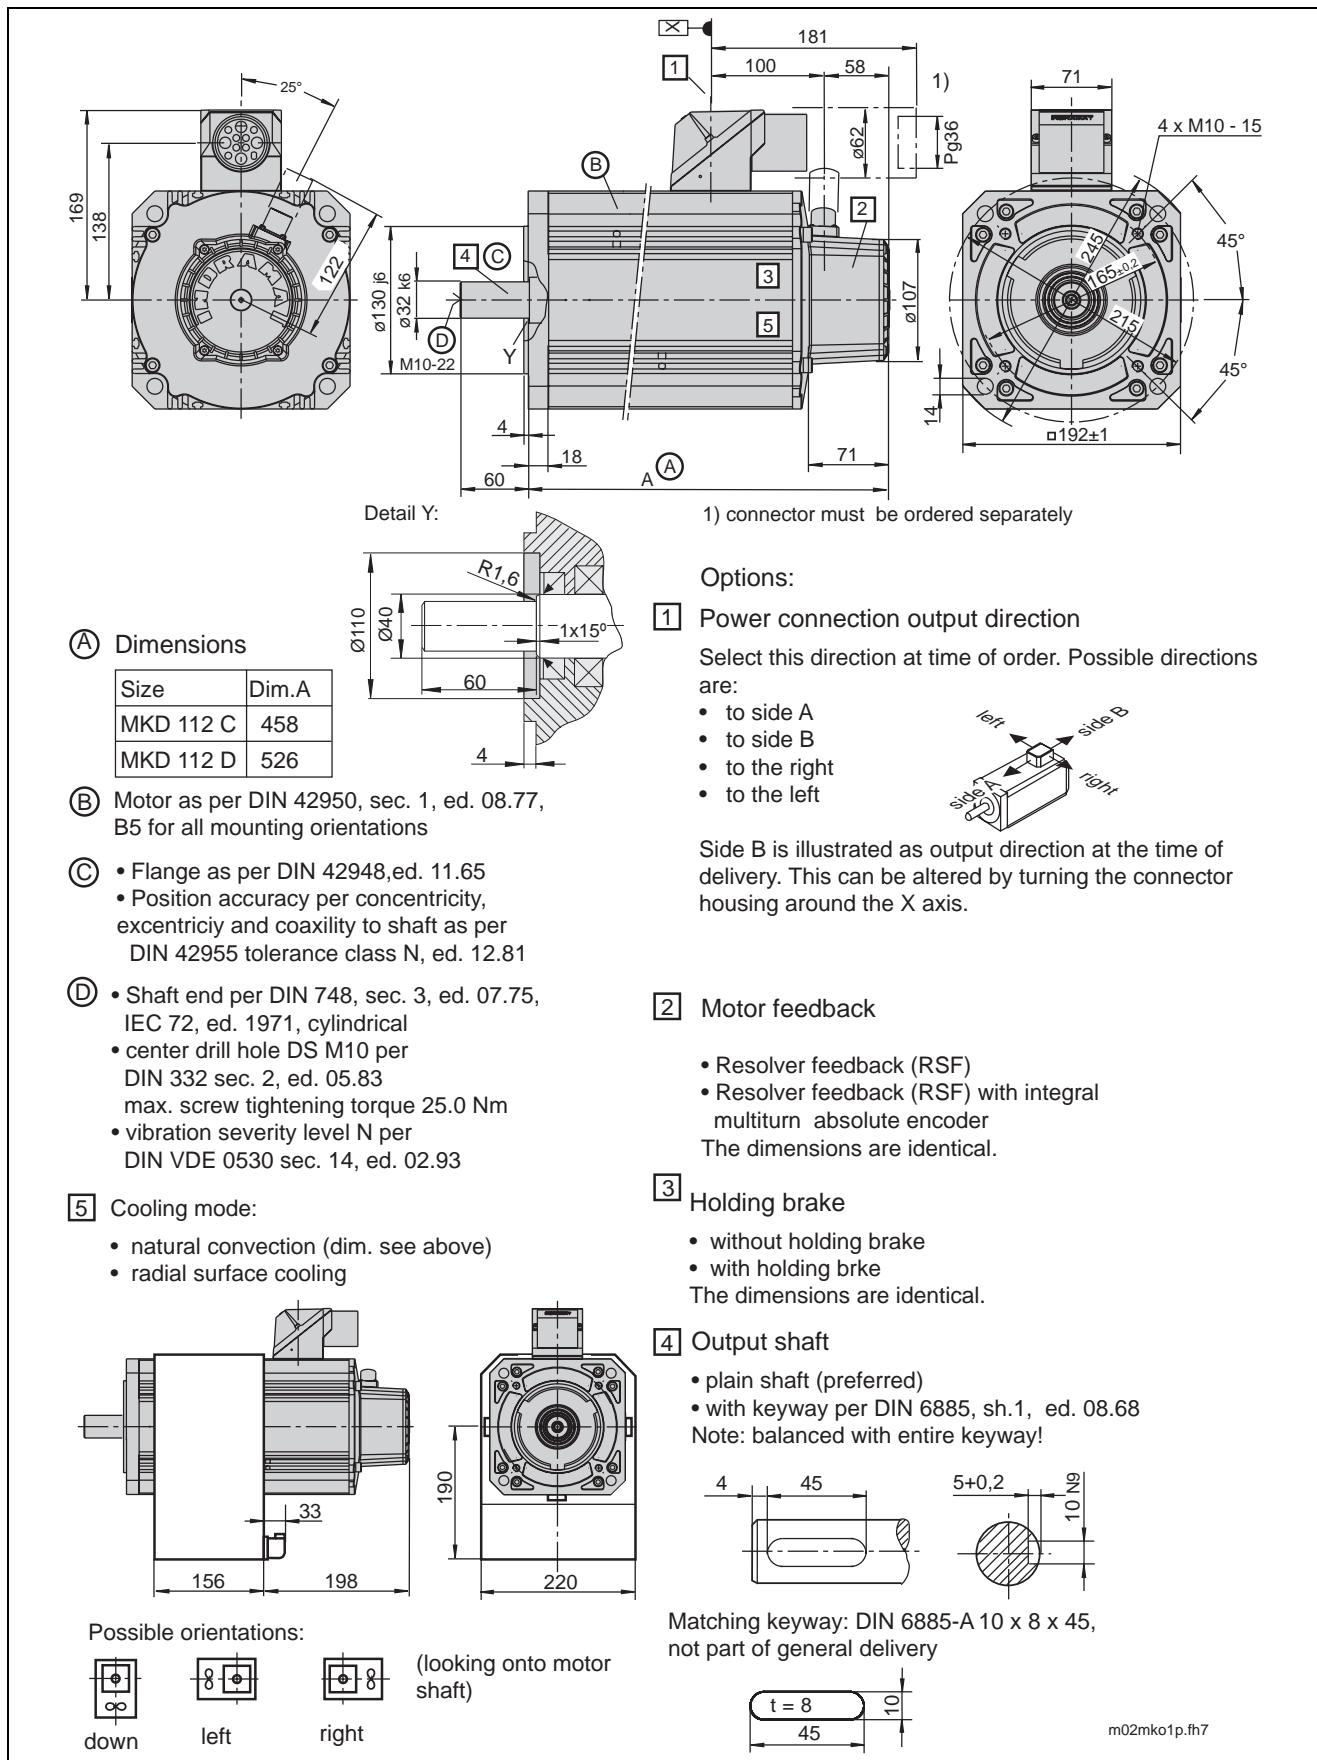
Dimensions sheet MKD112C-058, MKD112D-024
